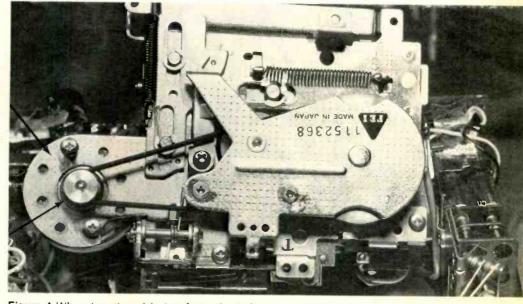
When tape-travel is too fast, check for tape scraps wrapped around the capstan shaft and for a motor drive belt that rides too high on the motor pulley. A defective motor also can run fast. But check for a speed control before replacing a motor. The control might be defective or misadjusted.
